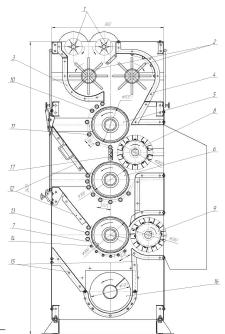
Diagram of a general view a purifier of raw cotton machine collection
